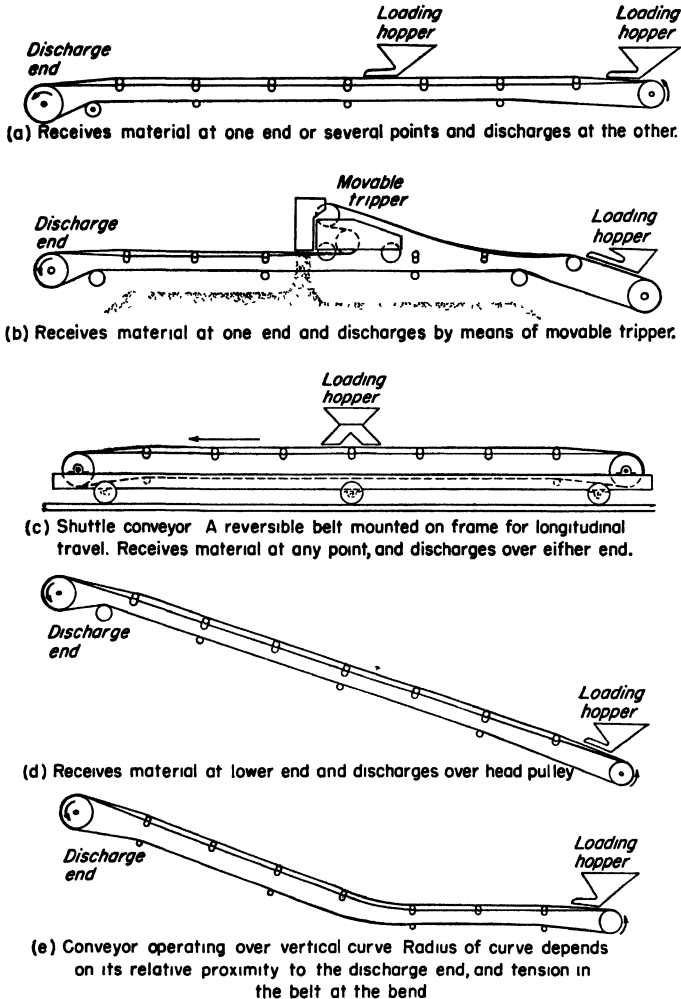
Belt conveyors, typical arrangements. Where tramp iron is to be removed, a magnetic pulley is placed on the last pulley of the head shaft.
